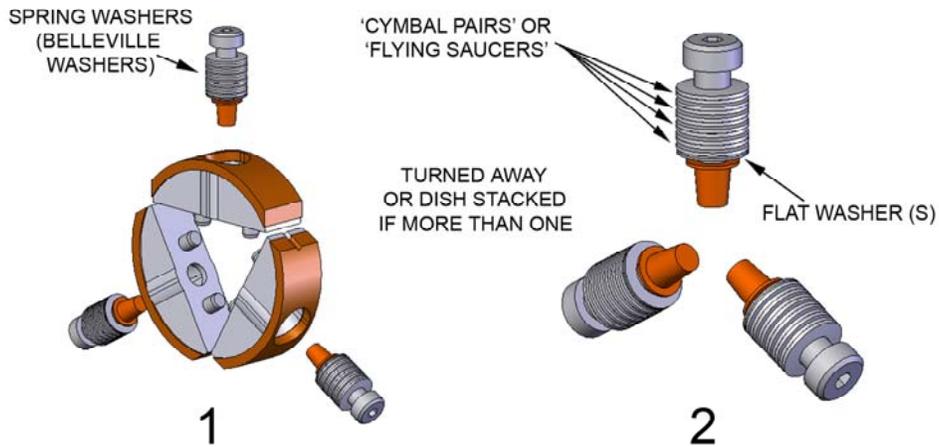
Some configuration of clutch spring stack. Each 'spring' stack contains multiple springs (Belleville washers) - arranged into three, four, or five 'flying saucers', or turned away against the flat washer(s). Shown is the 4 ½ stack.
